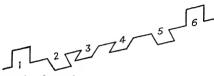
Conventional crank-arm arrangement in the six-cylinder in-line engine.
